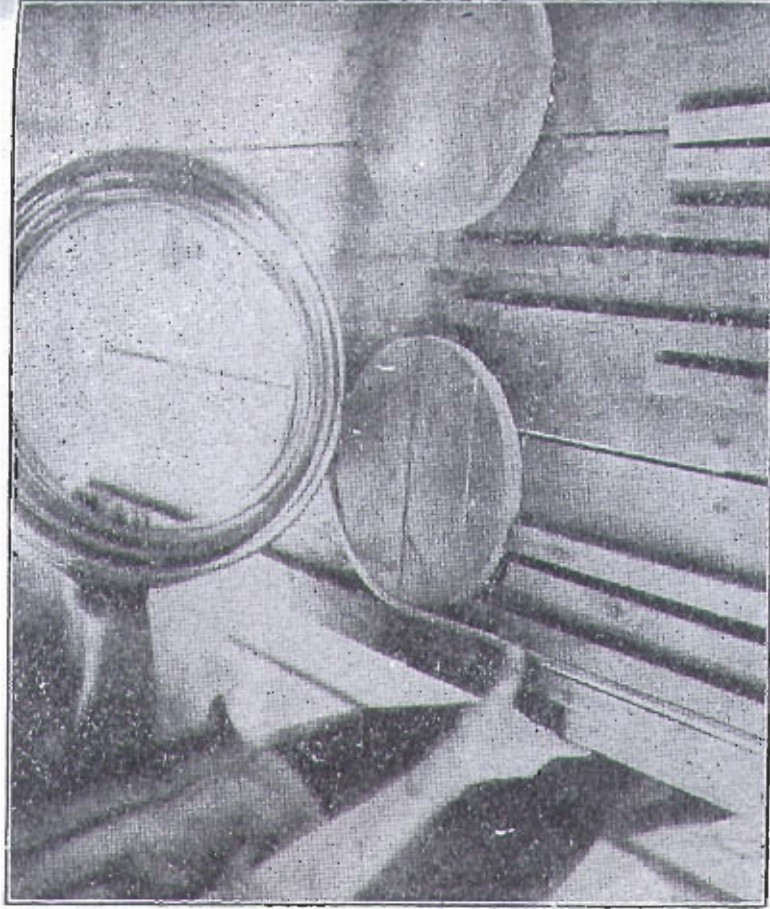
Illustrating method of forming bends when fabricating heating coils. Note guide strips in bench to assist in keeping the tube straight during coil forming operation.
